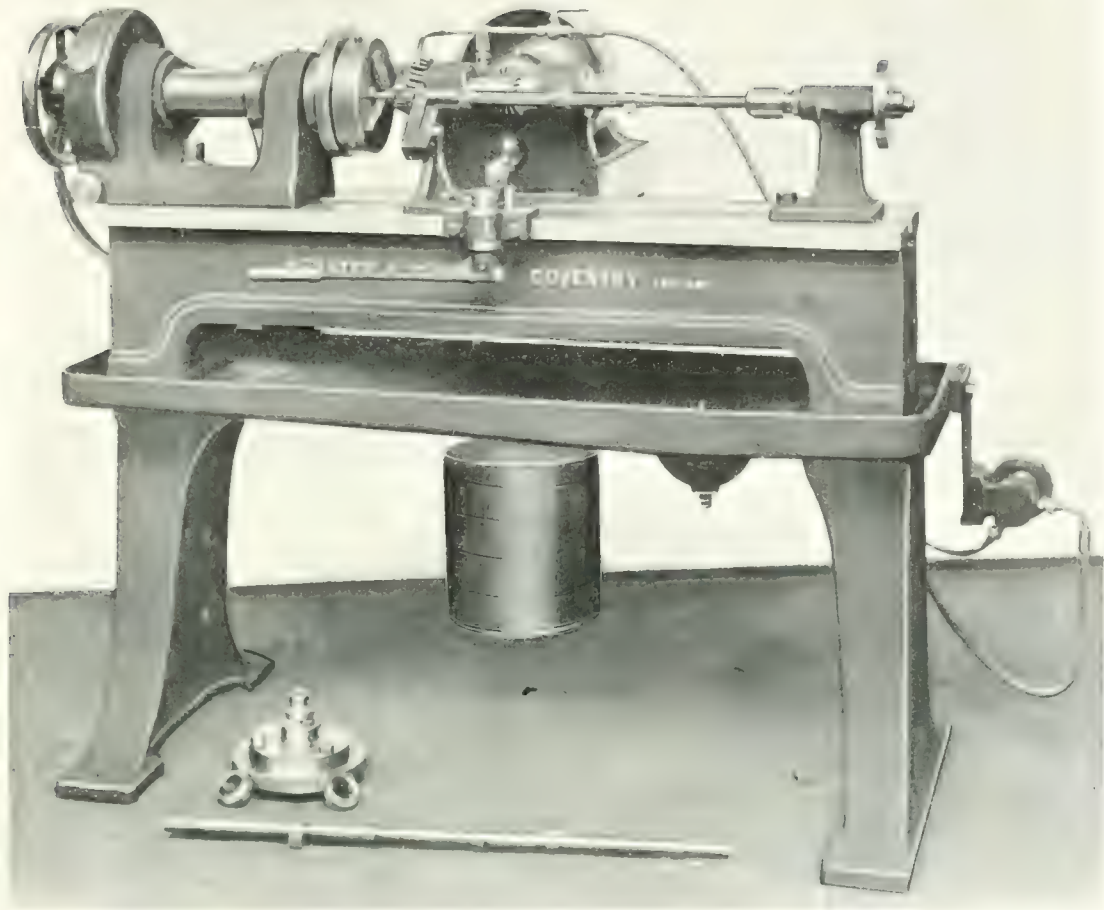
MOTOR CAM SHAFT TOOTHED MILLING MACHINE.
